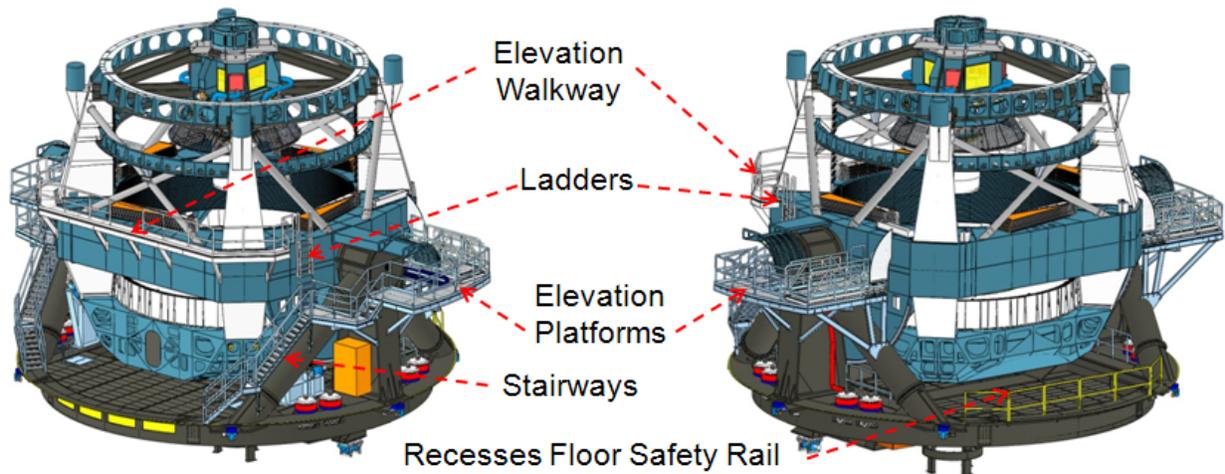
TMA Platforms, Stairways, Ladders and Safety Rails.
